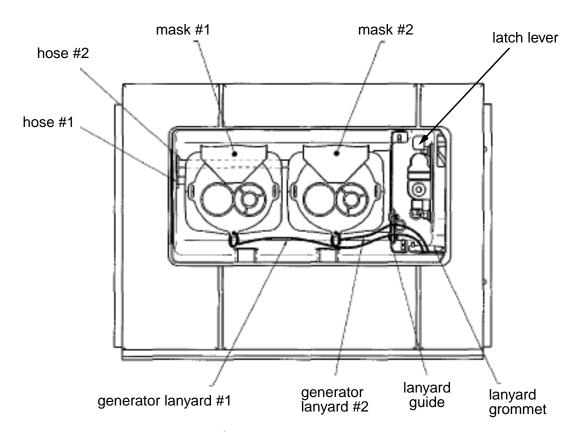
Closing the Door on the Right Hand Passenger Mask Assembly
